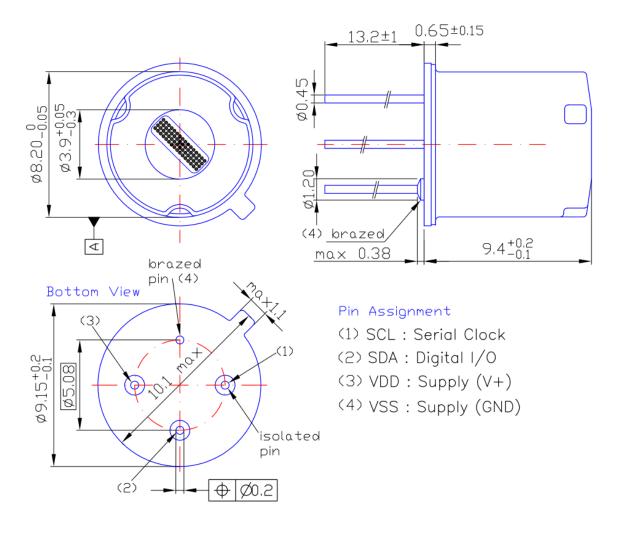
dimensional drawing of the HTPA16x4R1L7.0
